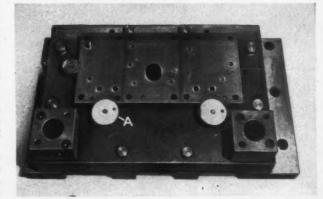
First stage press tool for the engine bracket seen in Fig. 13
